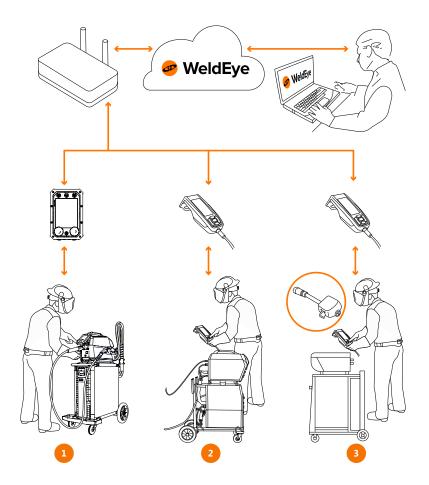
1. X8 MIG Welder 2. Kemppi FastMig, KempArc or A7 MIG Welder 3. Other welding machines
